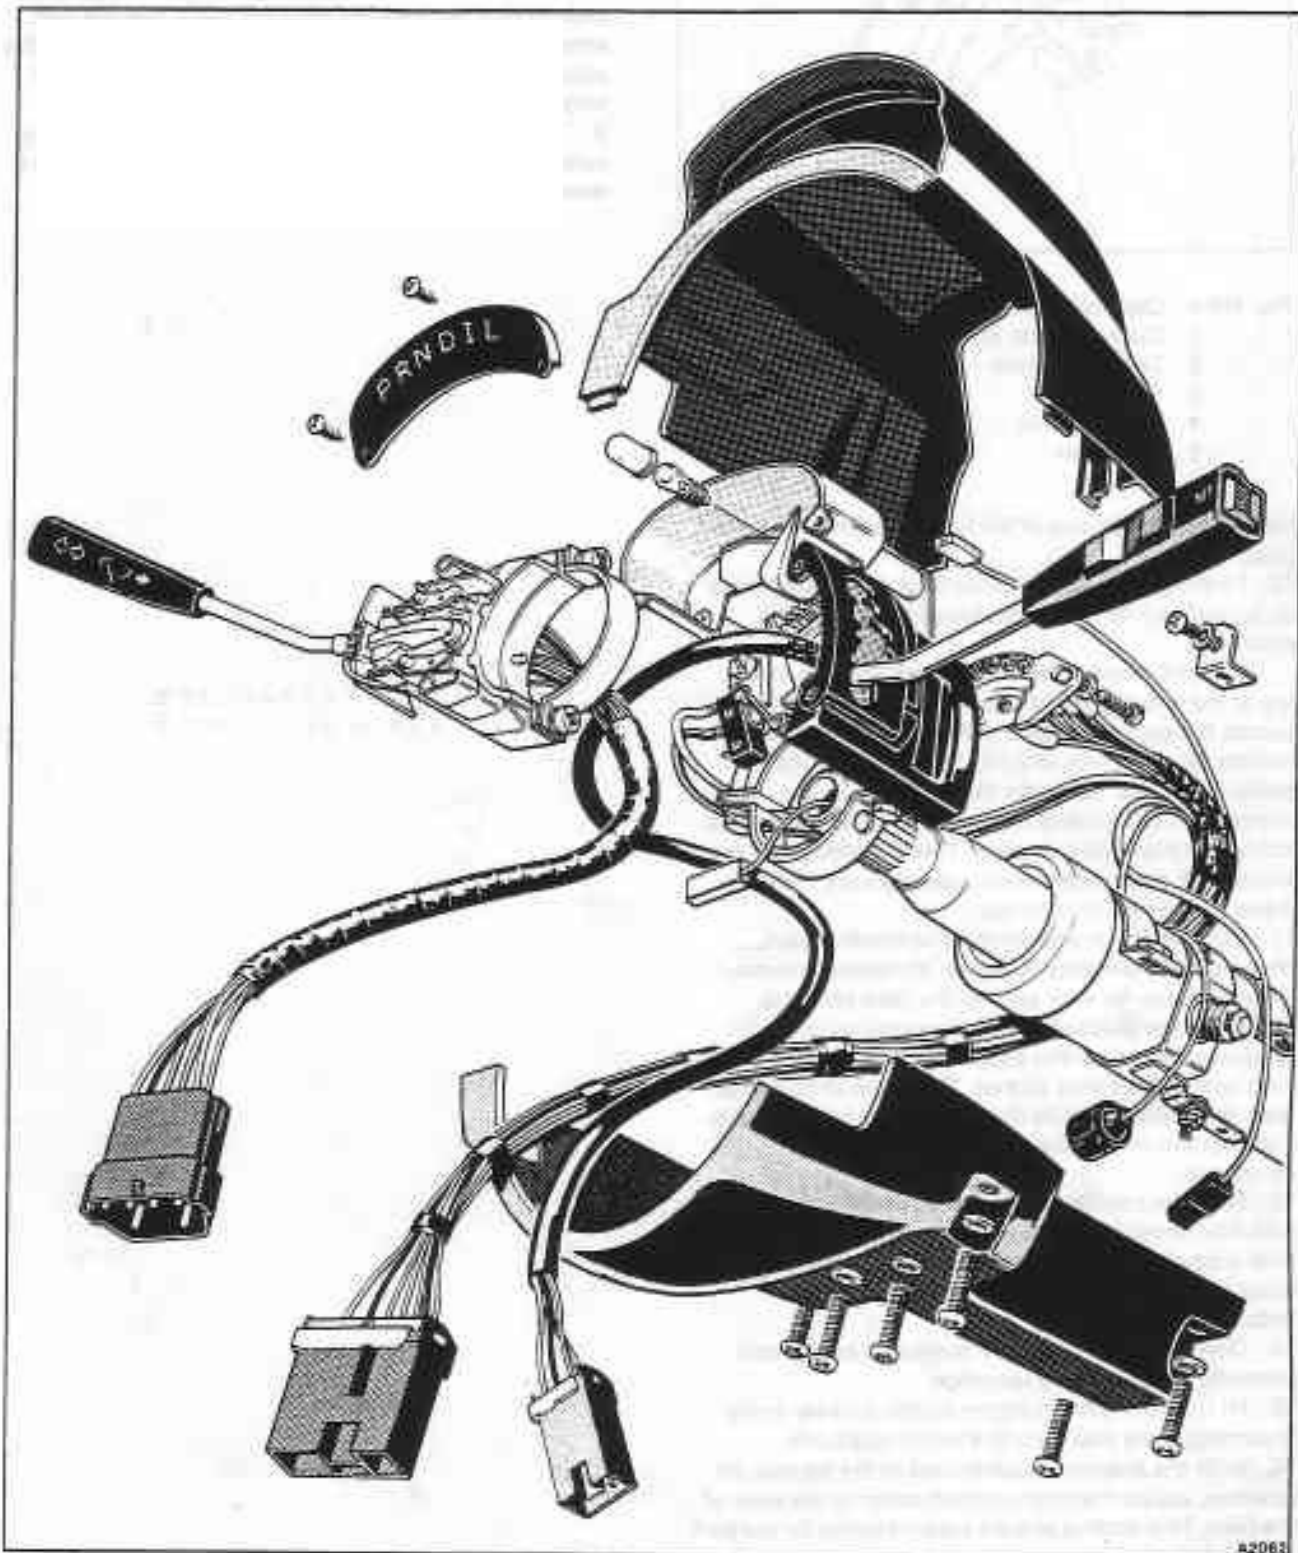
Gear range selector, direction indicator, wash/wipe units, upper and lower cowlings
